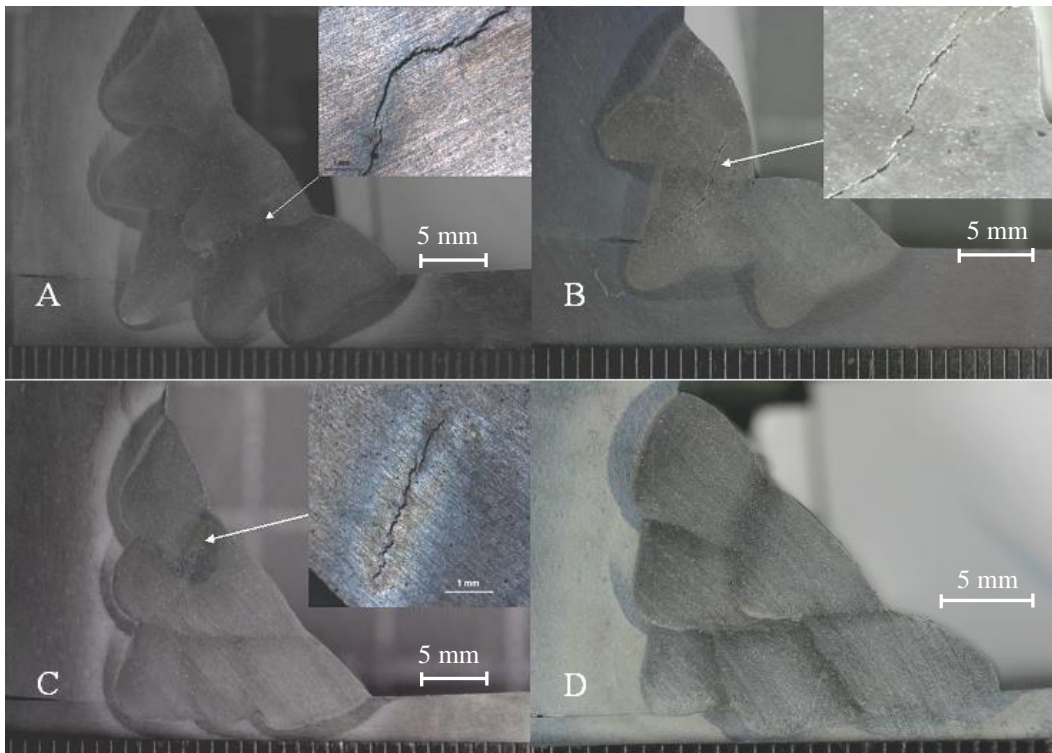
a: Binary Al-2319 welds showing cracking. b: Binary Al-2319 welds sequence #1- #3 showing cracking. c: Reduced deposition binary Al-2319 welds showing cracking. d: Ternary Al-Cu-Mg welds no cracking
